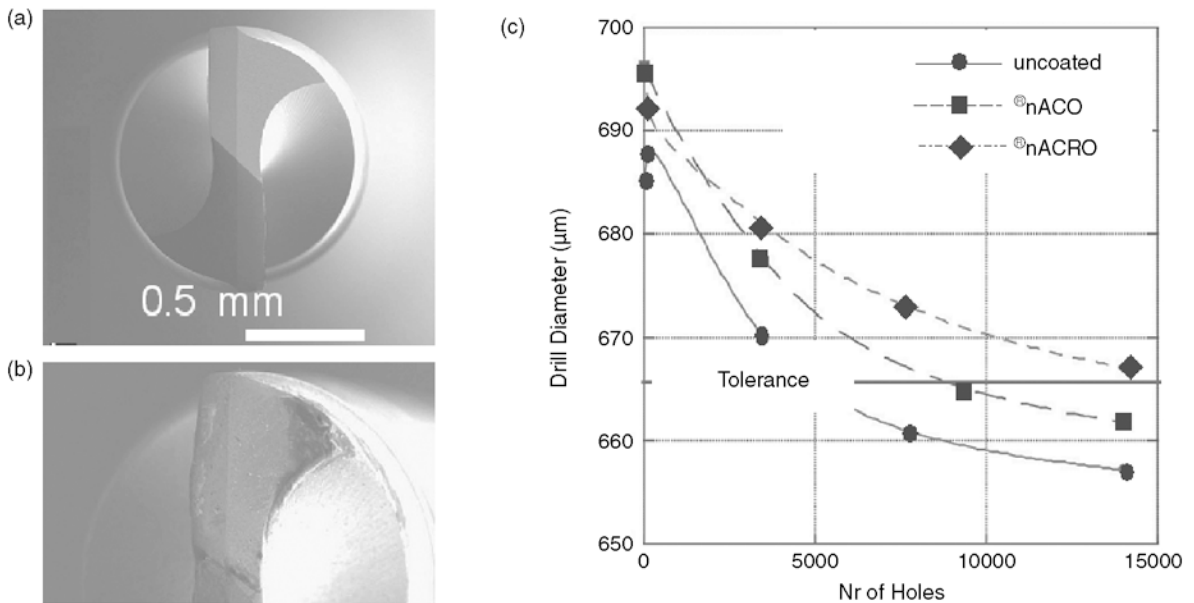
SEM pictures of a PVD-coated micro-tool blank (coating trade name nACRO[®]), (a) as coated and (b) after 14,000 drills on PCB plates. Figure 14.8(c) represents the tool wear during the drilling tests for uncoated, PVD-nACO[®] and PVD-nACRO[®] in the form of blank diameter, as a function of the number of drills. The horizontal line represents the tolerance of the tool (courtesy of Dr Ibon Azcona, Metalestalki – PLATIT ACS Ltd).
